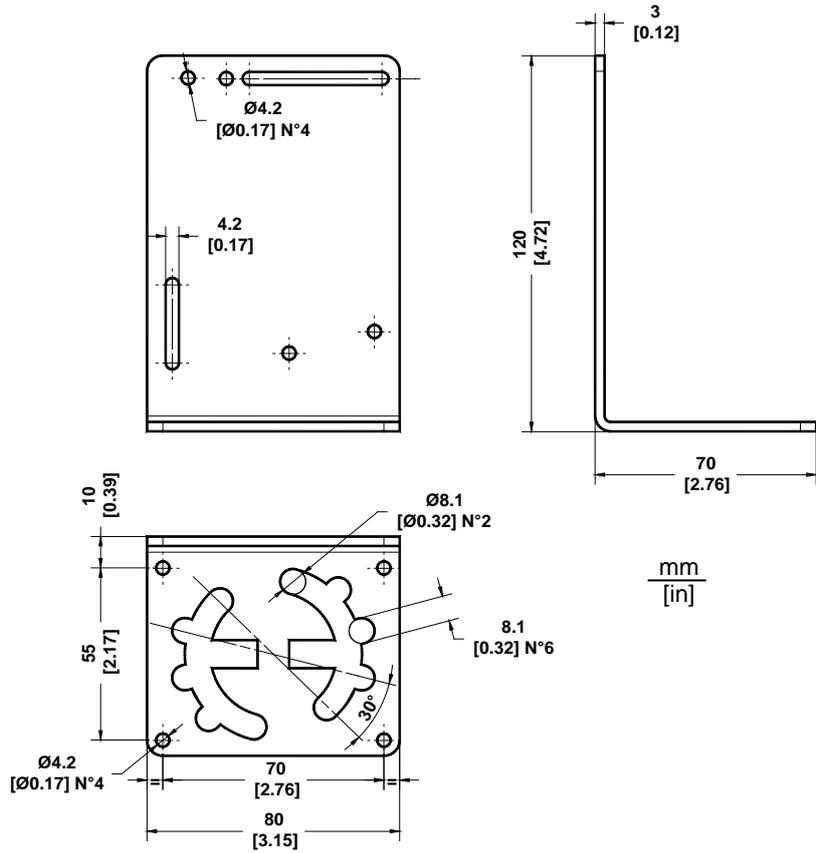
L Shape Mounting Bracket Overall Dimensions
